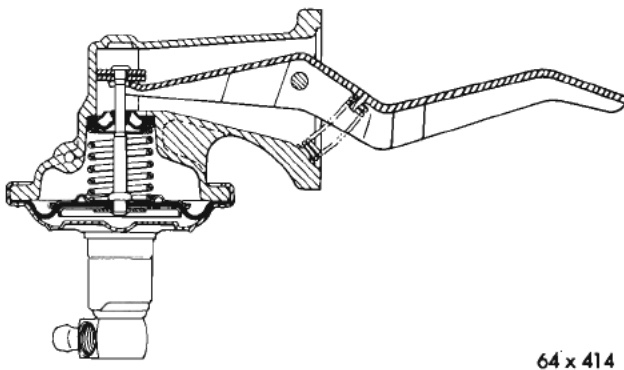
Fuel Pump Assembly (273-318 Cu. In. Engine)
